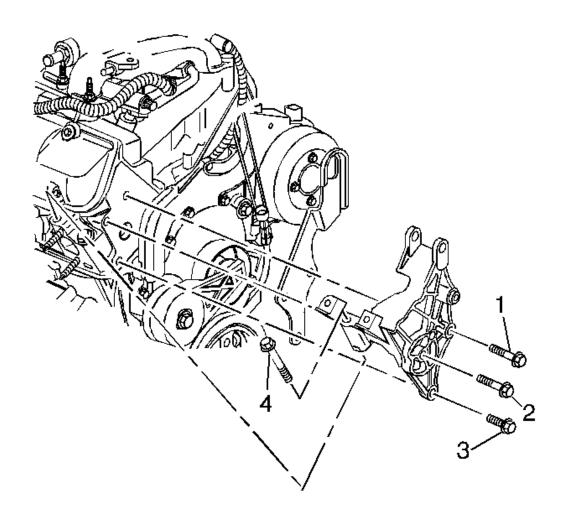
Removing Engine Mount Strut & Lift Bracket Courtesy of GENERAL MOTORS CORP.
